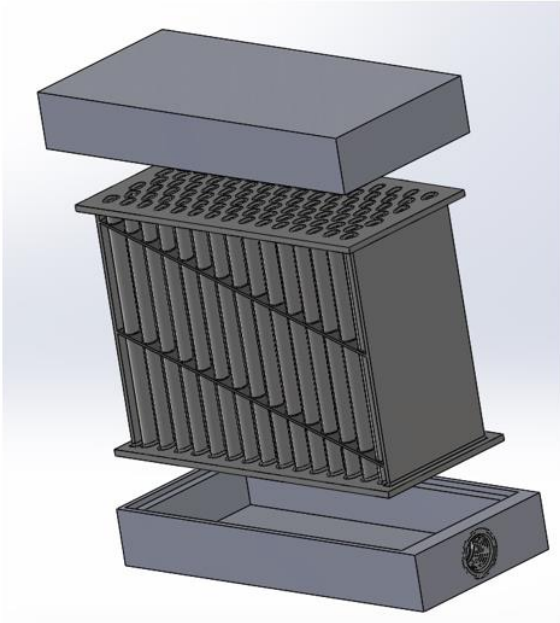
Assembled Additively Manufactured AOHX with ABS Headers
